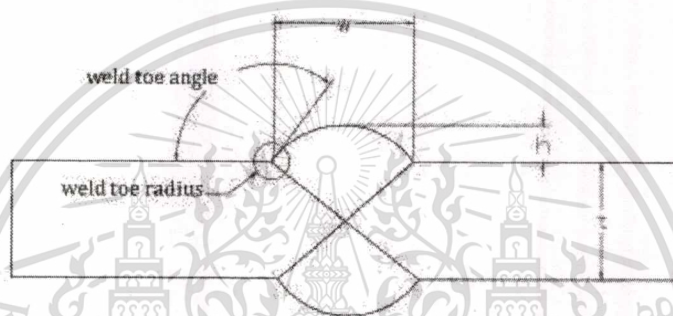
Dimension of butt welded joint; weld height h , plate thickness t , weld width W , weld toe radius ρ , and weld toe angle α (Radhi H.E. and Barrans S.M., 2010).
